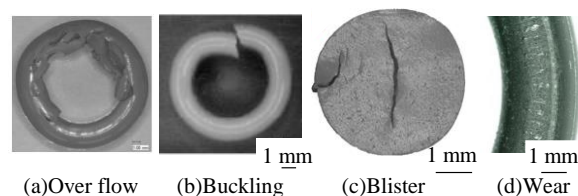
The fracture pattern of O-ring. (Reprinted from [2])
